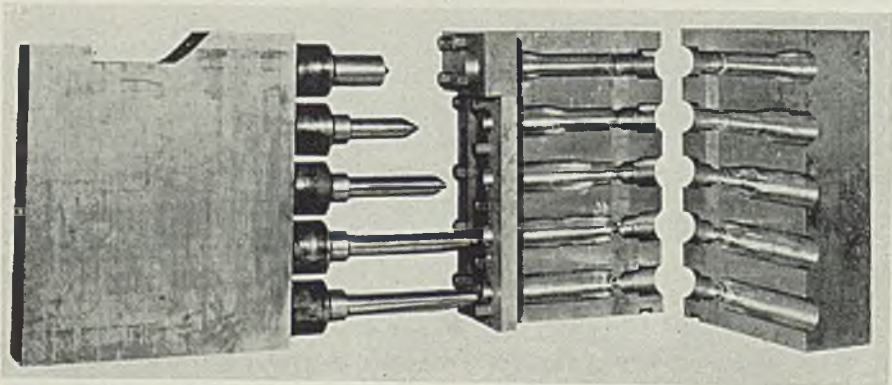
(Bottom)—Piercing tools and dies for an Acme upsetting forging machine such as shown in Fig. 5
